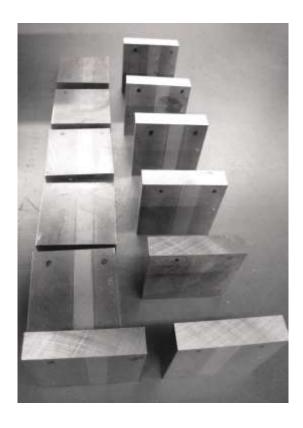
E399 CTS sample sections from GMA weld surface ground and macro etched to reveal weld metal and fusion line; CTS notches samples offset for HAZ fracture testing
